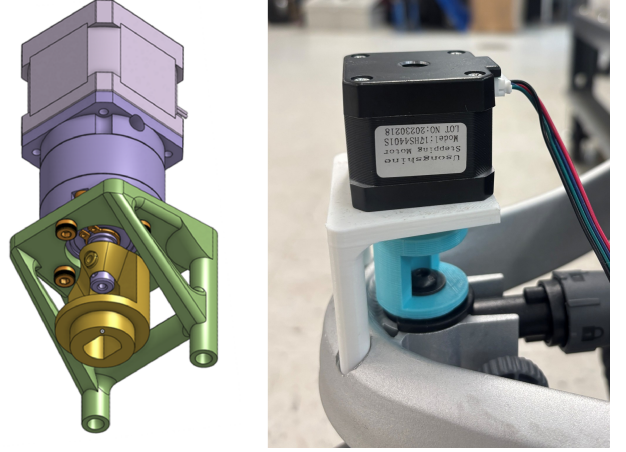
CAD of upgraded gearbox mount (left) and real-life support piece (right).
